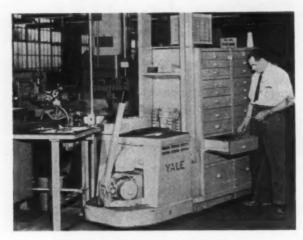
A traveling tool crib often saves toolmaker's time and expense by bringing parts, materials and drawings to work sta-
